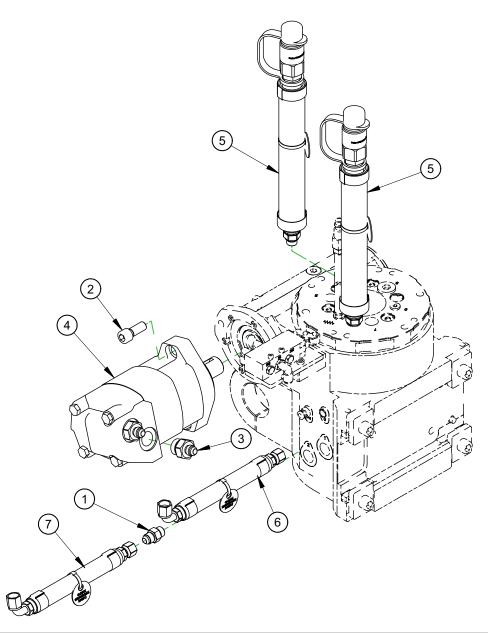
SURFACE MOUNT ASSEMBLY (P/N 82309)
